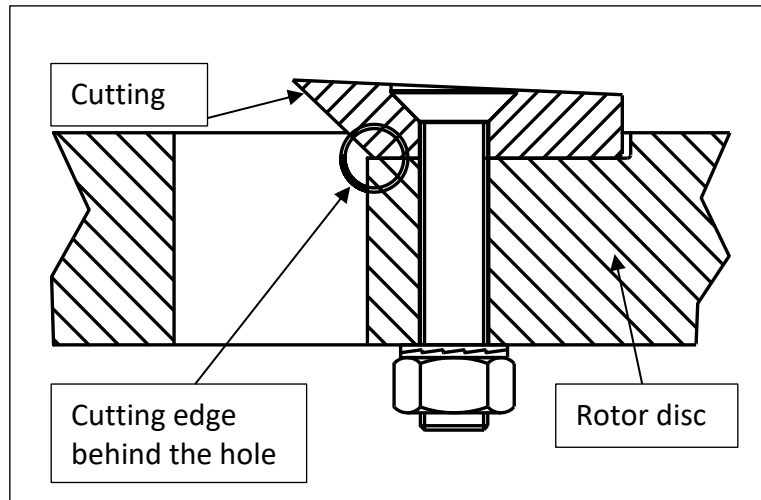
The blade's cutting edge is behind the edge of the hole through the rotor
